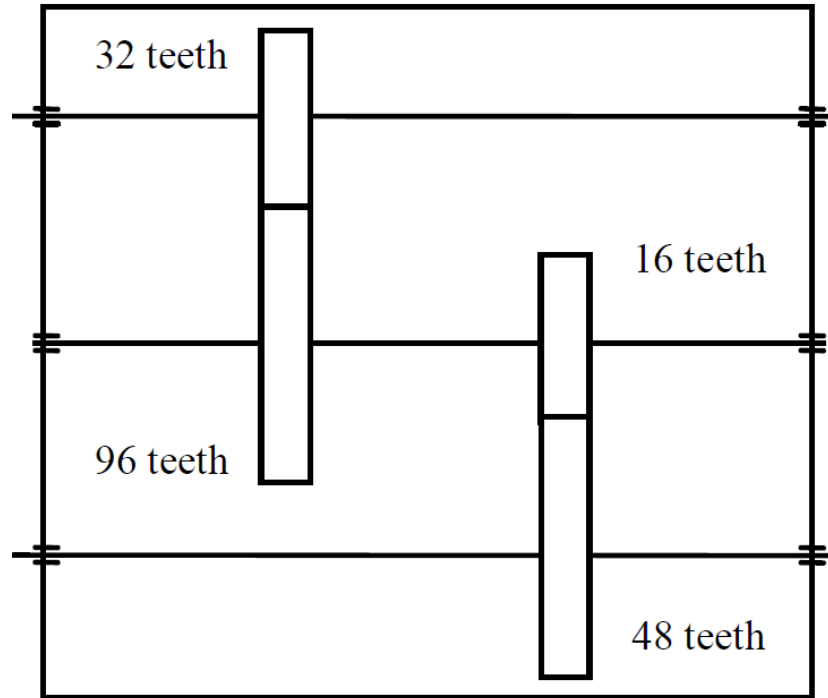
Motor driving the 32 teeth gear shaft, and there is a brake on the right connecting the 48 teeth gear shaft [40]
